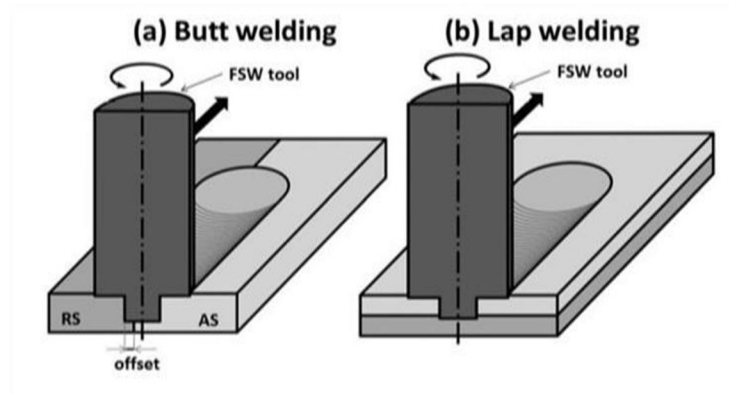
Dissimilar friction stir welding for (a)Butt and (b) lap welds. As, advancing side; RS, retreating side.
